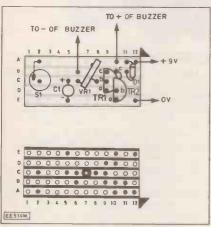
Stripboard component layout and connection details for the mercury switch, diode and transistor.
